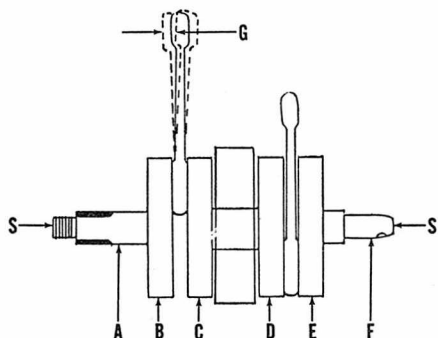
Refer to text for checking crankshaft assembly and wear limits.
